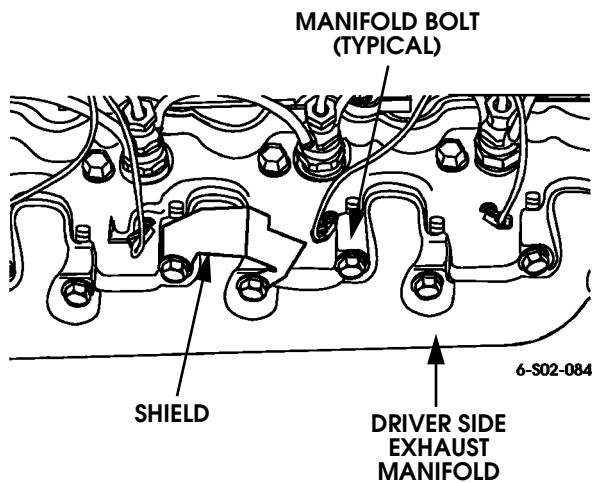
Left Side Exhaust Manifold Removal (Turbo Diesel)
